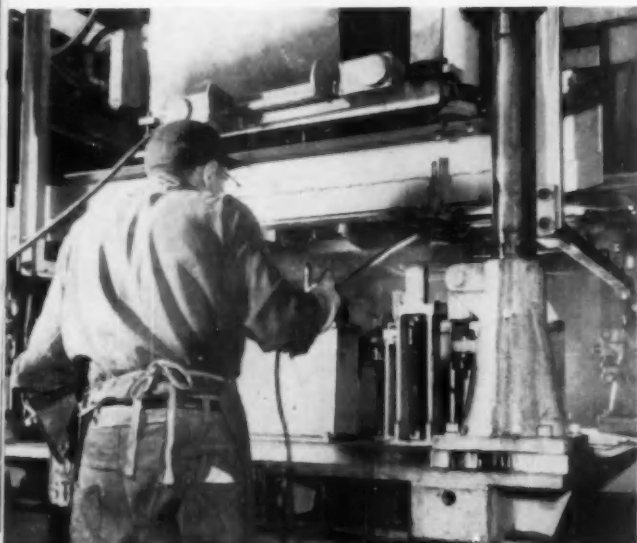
With the magnetic rod here shown, the operator loads a window stop near the center of a welding die and thereby avoids putting his hands inside this die. Tripping of the press is with two palm buttons.
